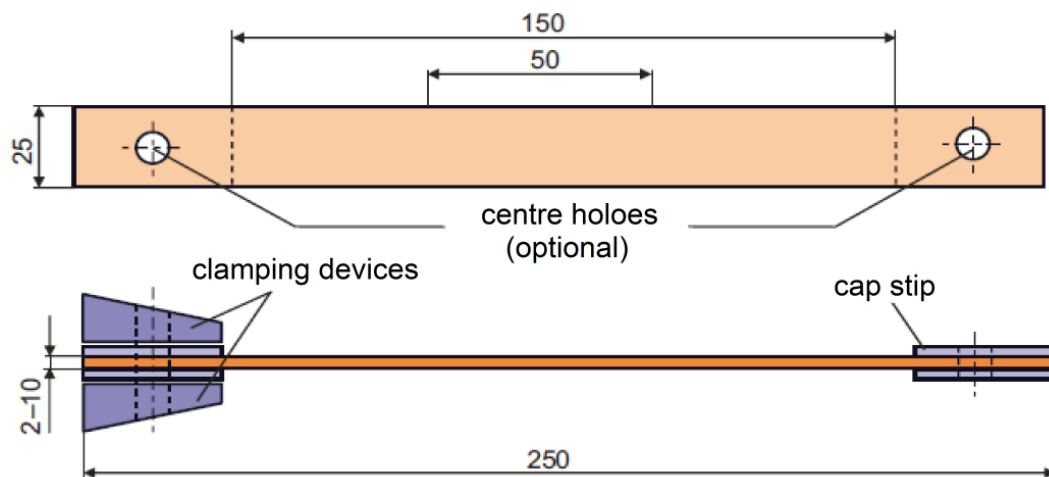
Specimen geometry for the tensile test according to ISO527-4 type2
